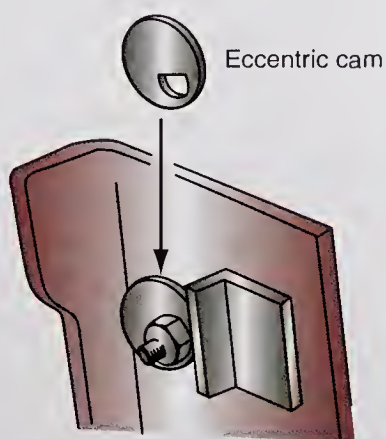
Eccentric cam installed behind upper control arm attaching nut.
